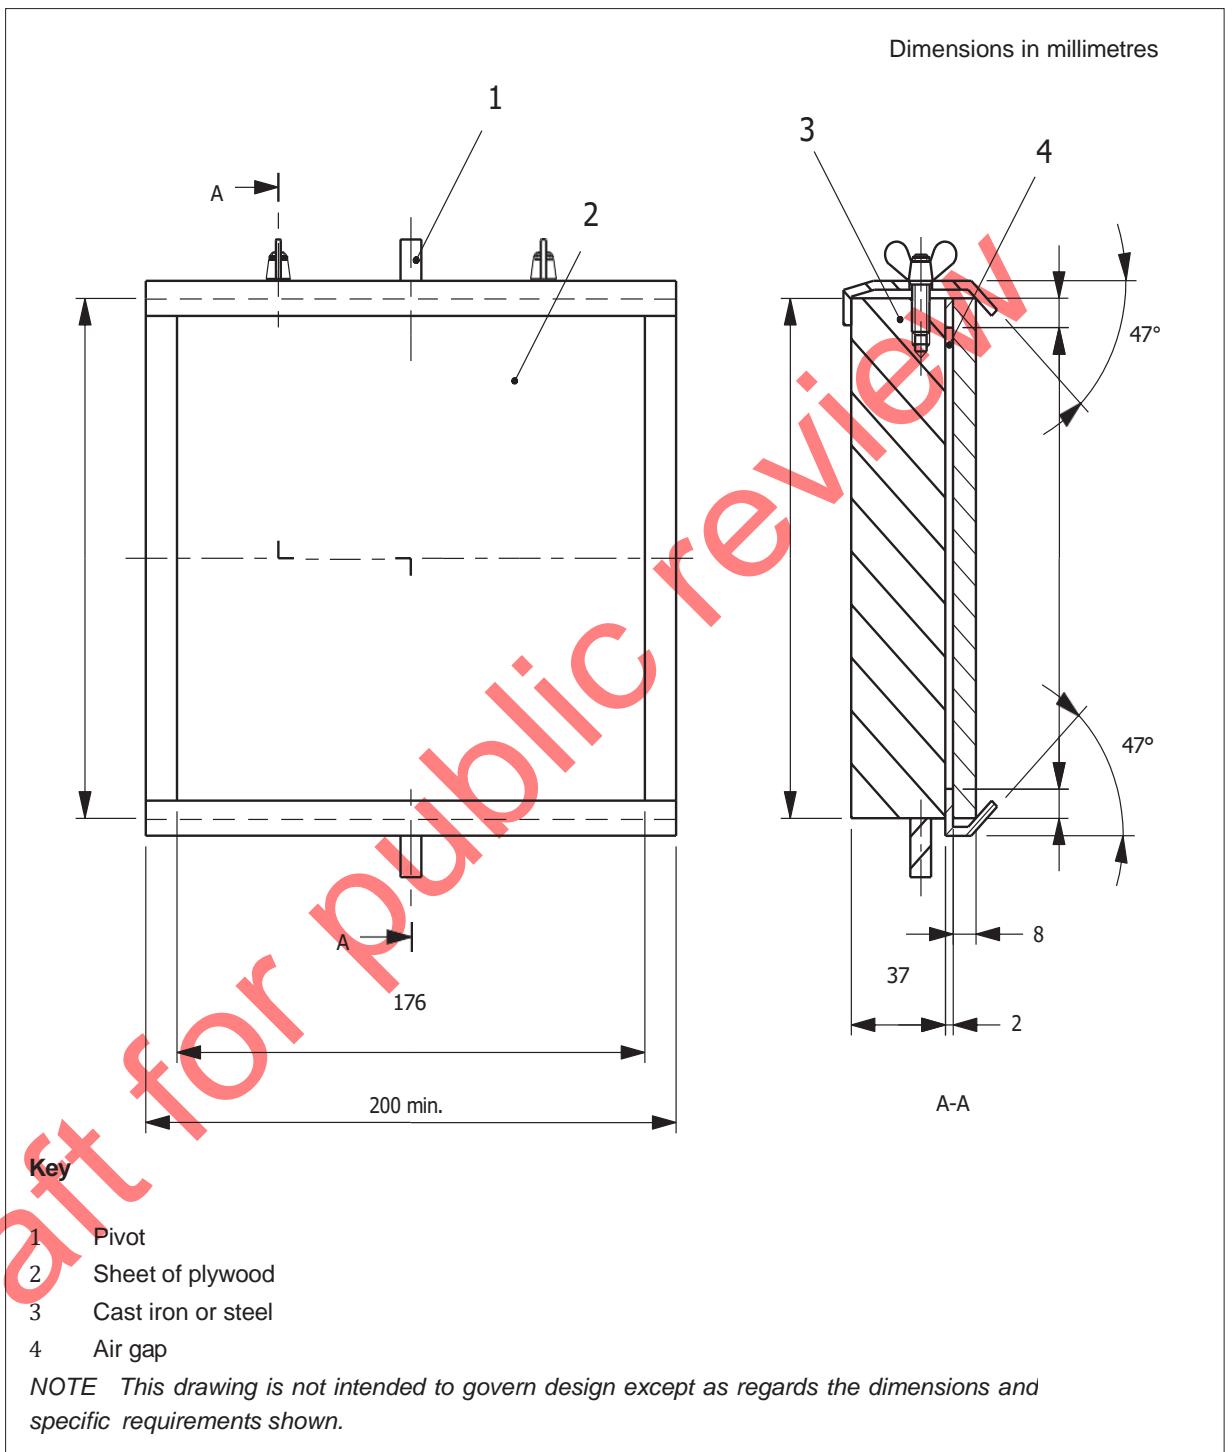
Pendulum impact test: *Constructional details of striking elements
